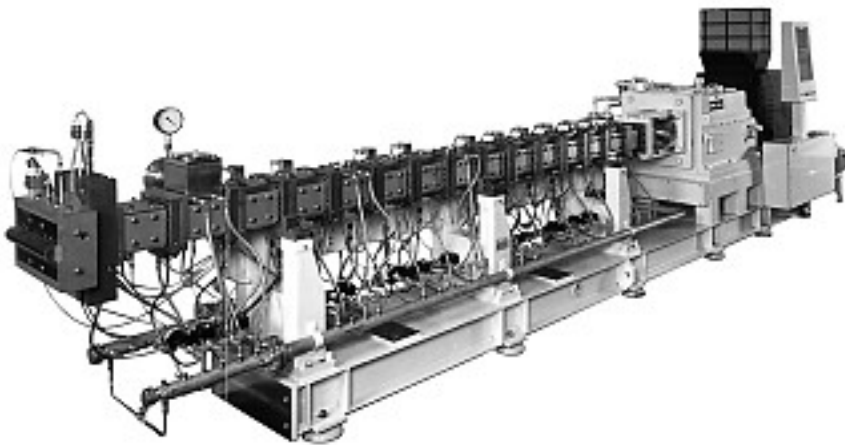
Intermeshed co-rotational twin screw extruder with segmented barrel and screw (JSW TEX)
